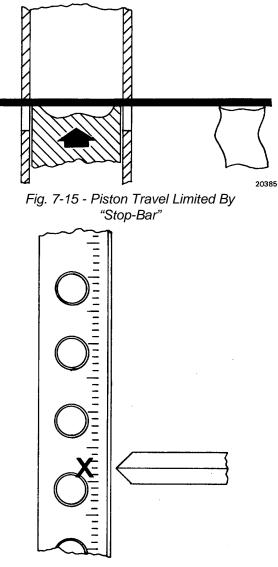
Limit Of Piston Travel Marked On Flywheel
